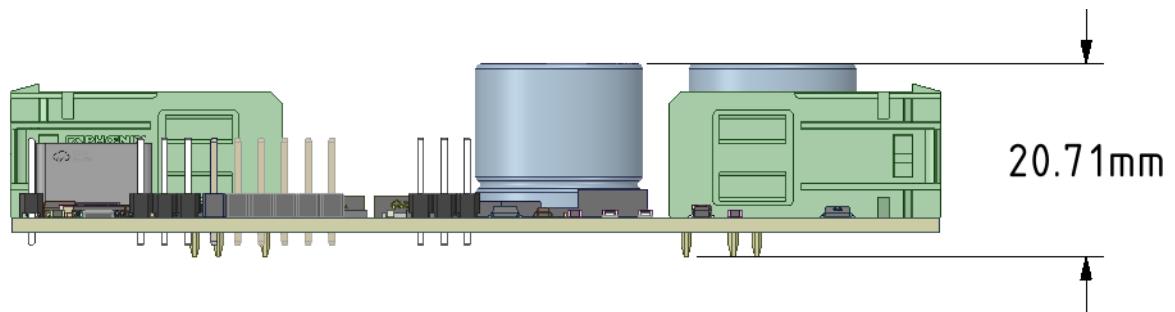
ZIKODRIVE 2 Side View (Without Casing)
